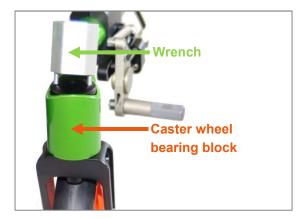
Loosen the nut of the caster wheel axle using the wrench
